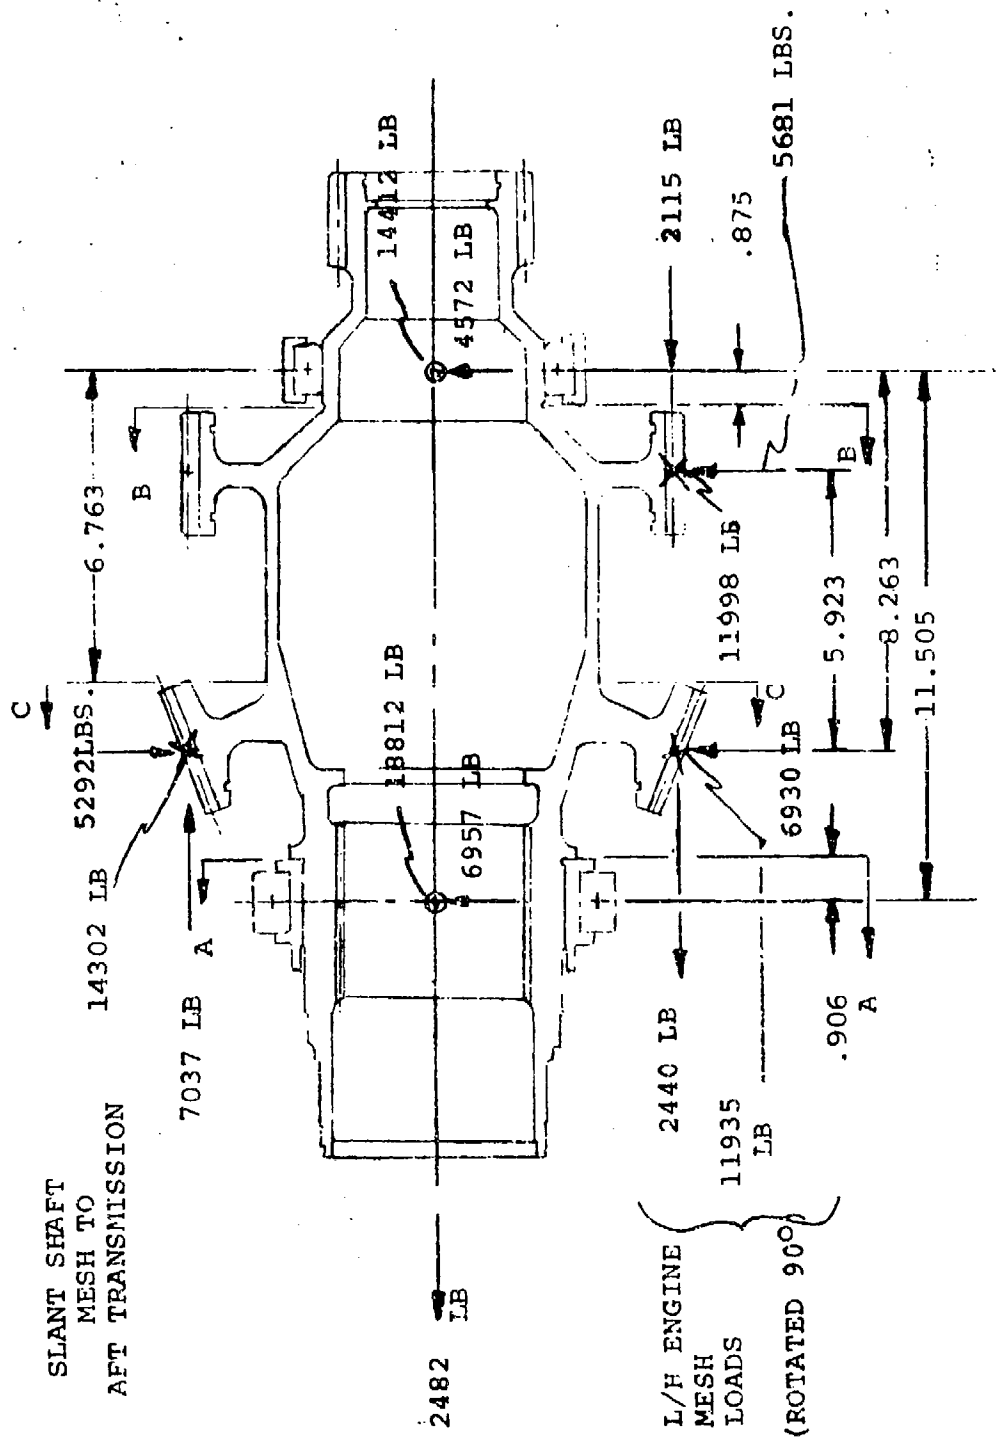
Housing, Clutch-Engine Shaft, Combiner Transmission.
